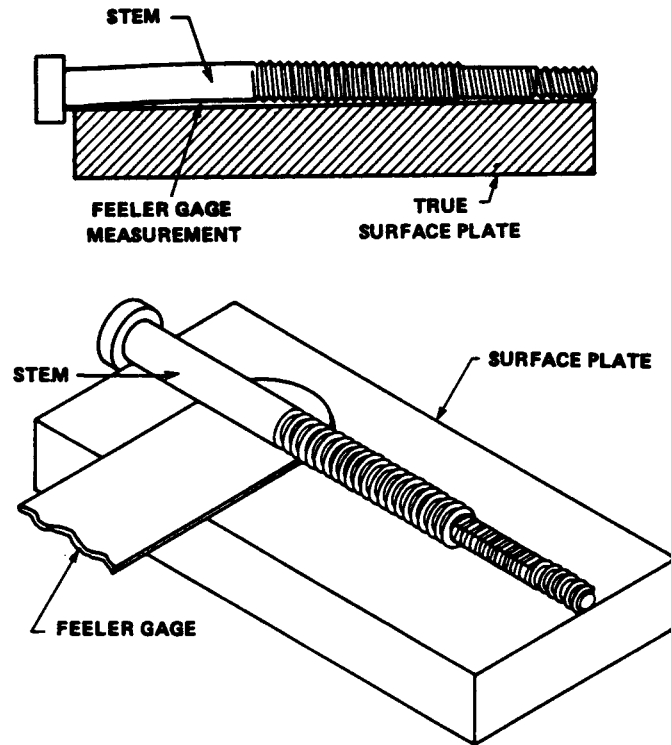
Surface Plate/Feeler Gage Method of Determining Stem Alinement Total Indicator Reading
